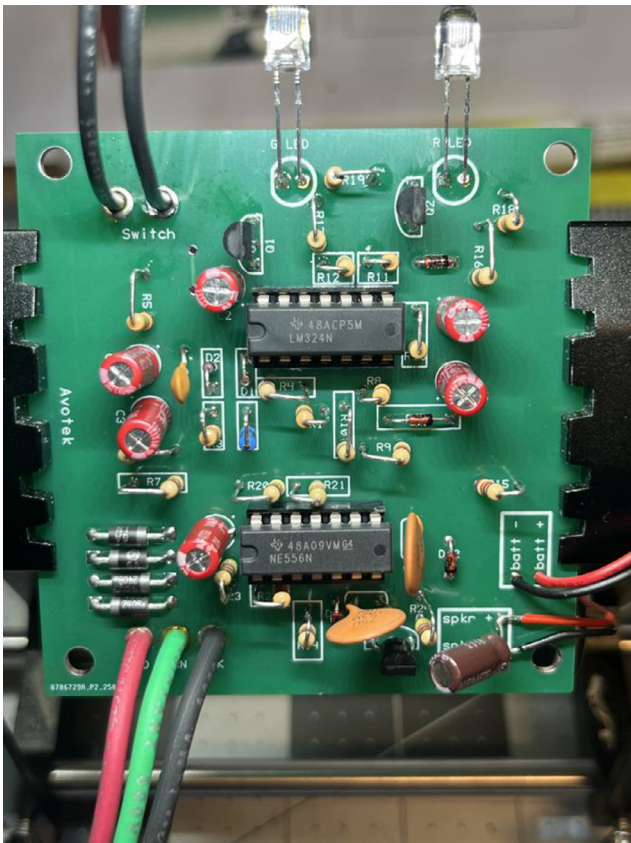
The PCB after assembly and the magneto timer is fully functional.
